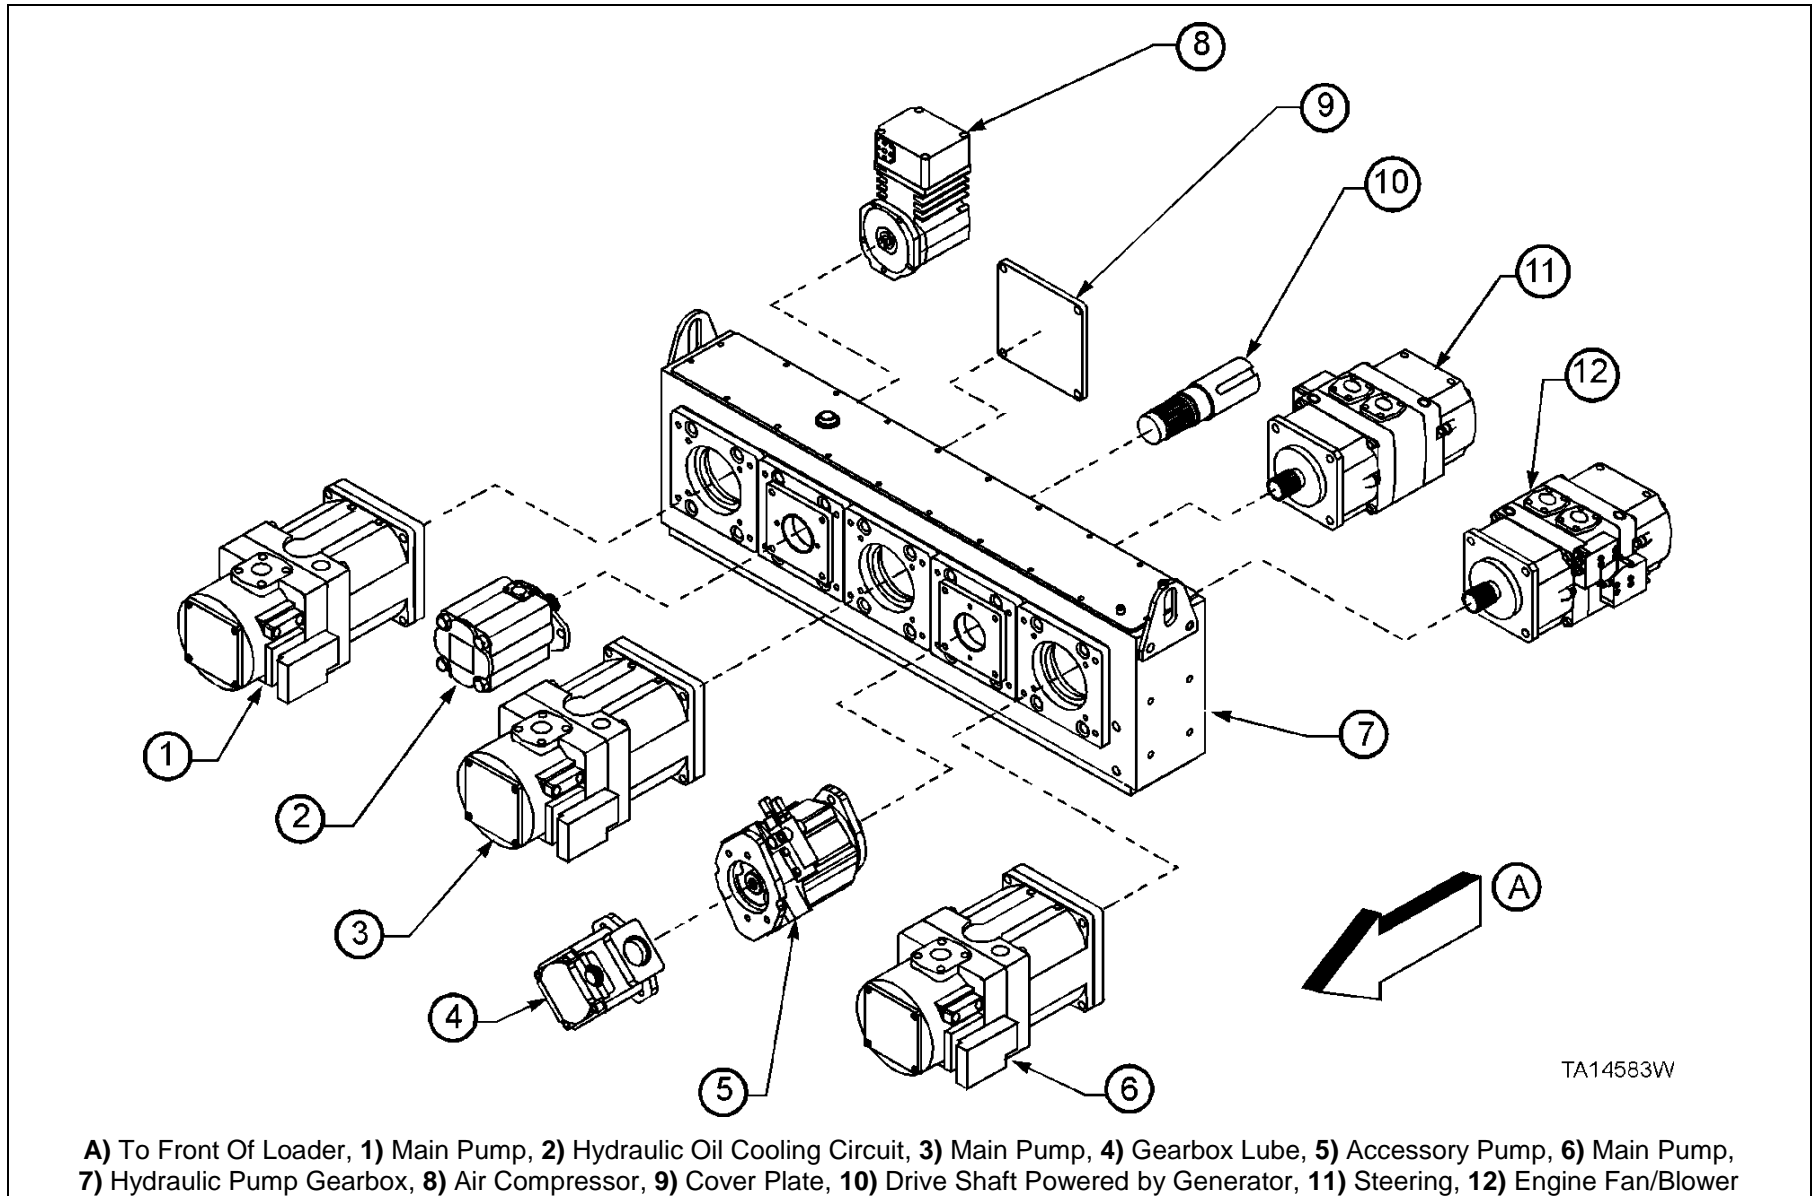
L-1350 Hydraulic pump arrangement (typical pump types are illustrated)
